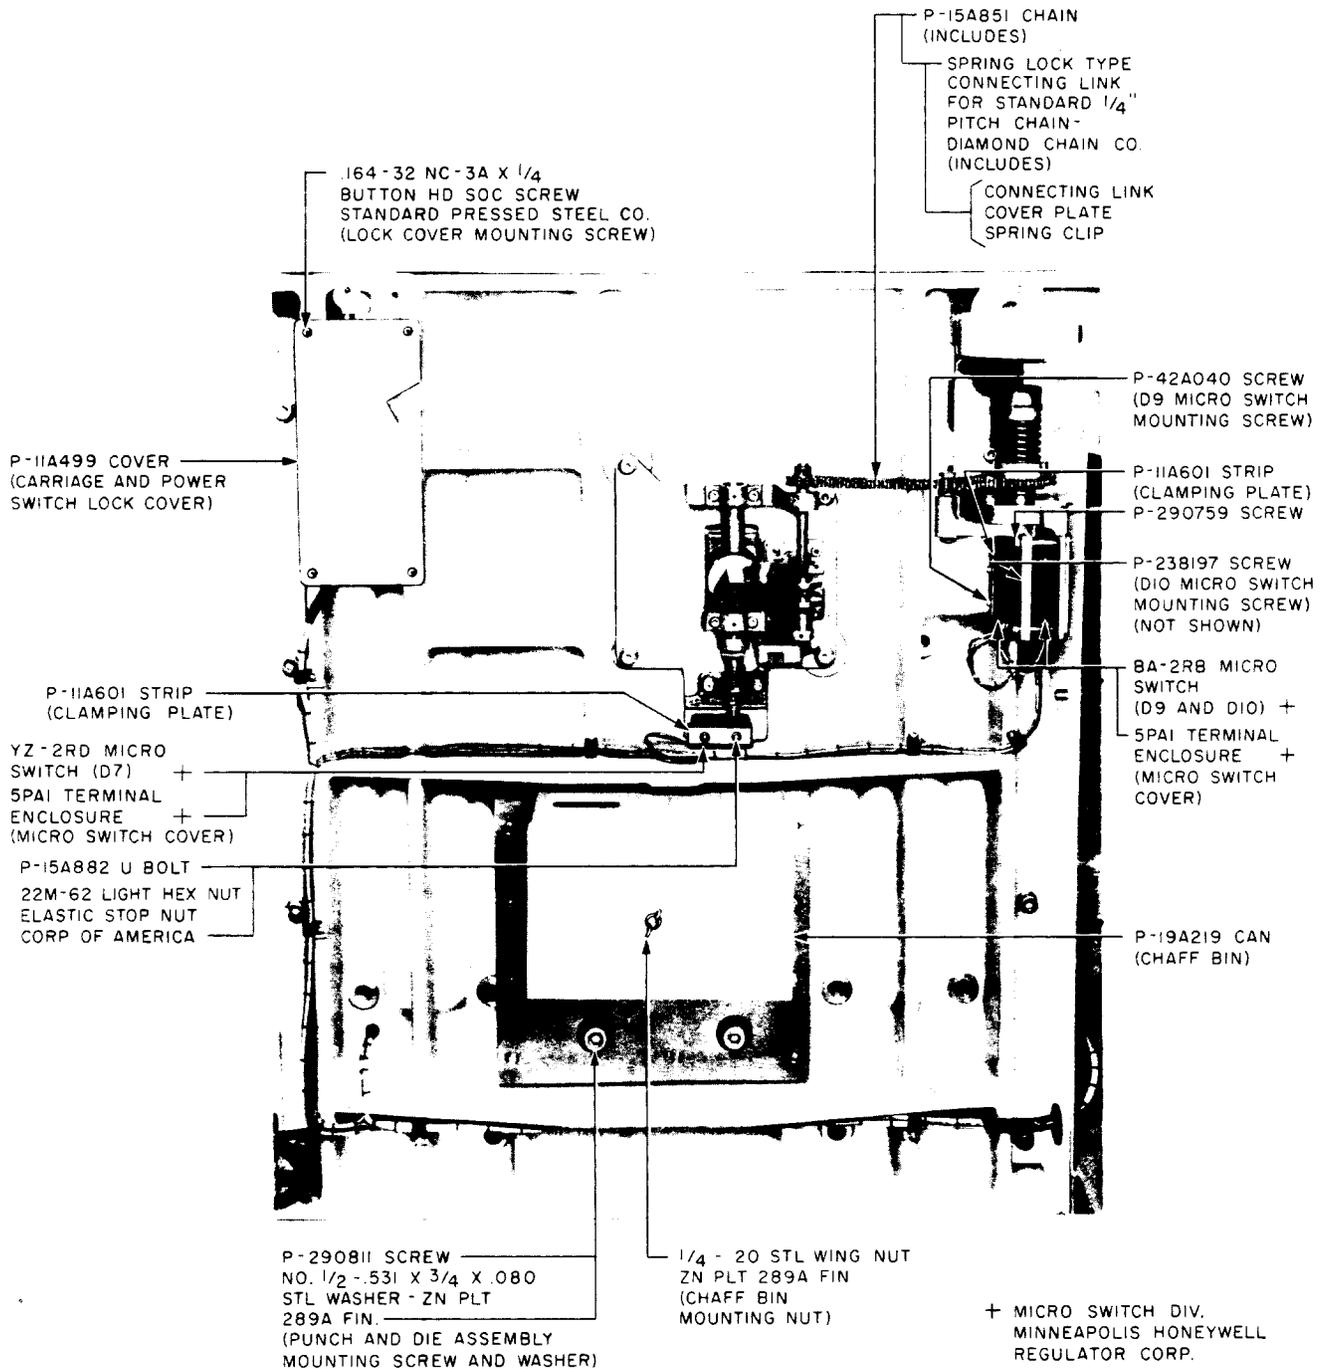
659B, 659C, 659E, and 659F Tools — Underside of Table
